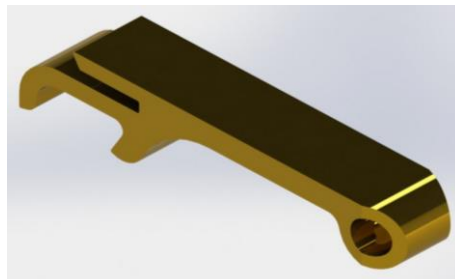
CAD model of the single component bottle opener (Source: <https://grabcad.com/library/bottle-opener-32>)
